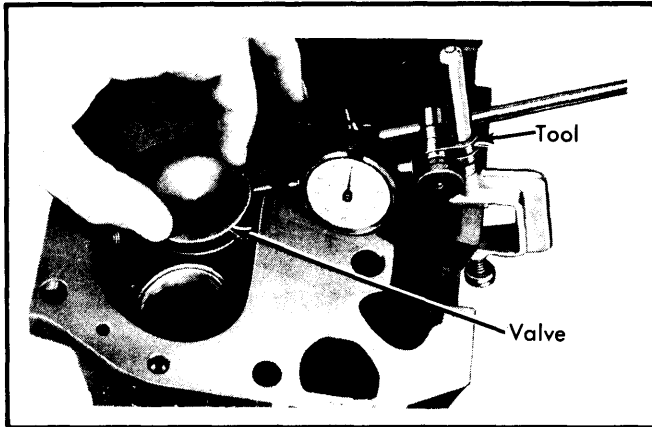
Using Dial Indicator to Measure Valve Guide Wear
